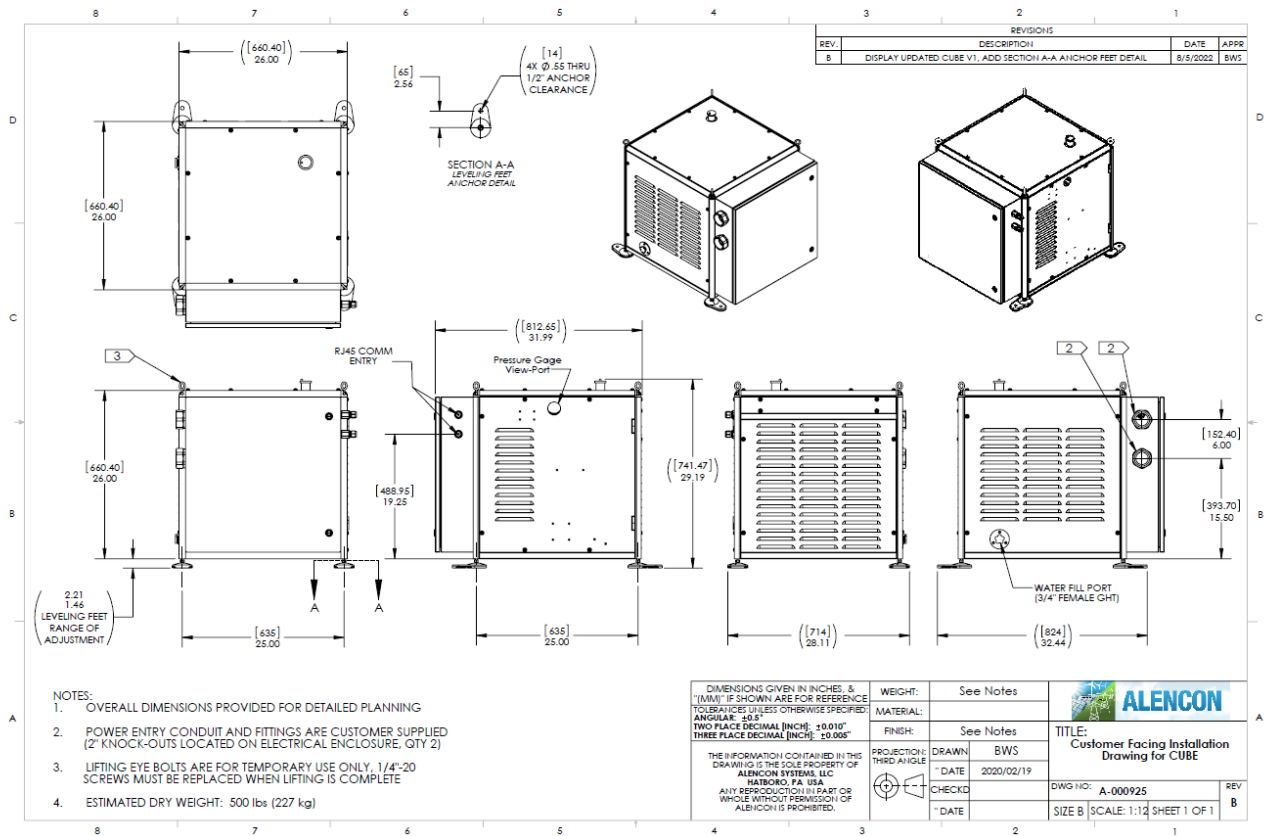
MECHANICAL DIMENSIONS OF CUBE
